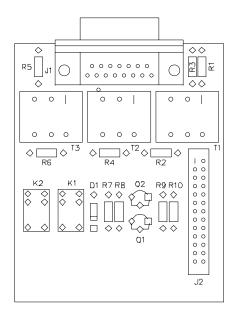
Assembly Drawing—OPT-100 Module Rev. A
